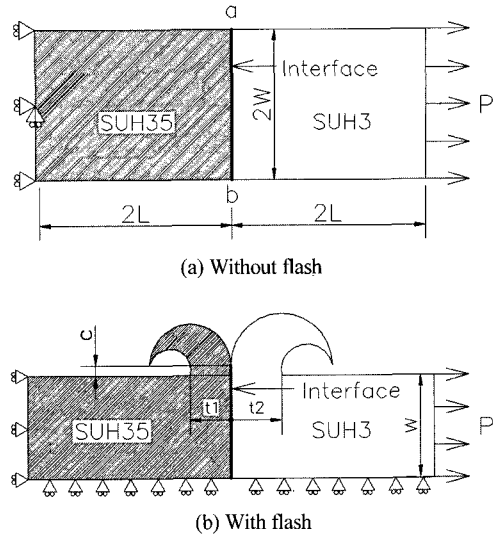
Model of BEM analysis on friction welded dissimilar materials
